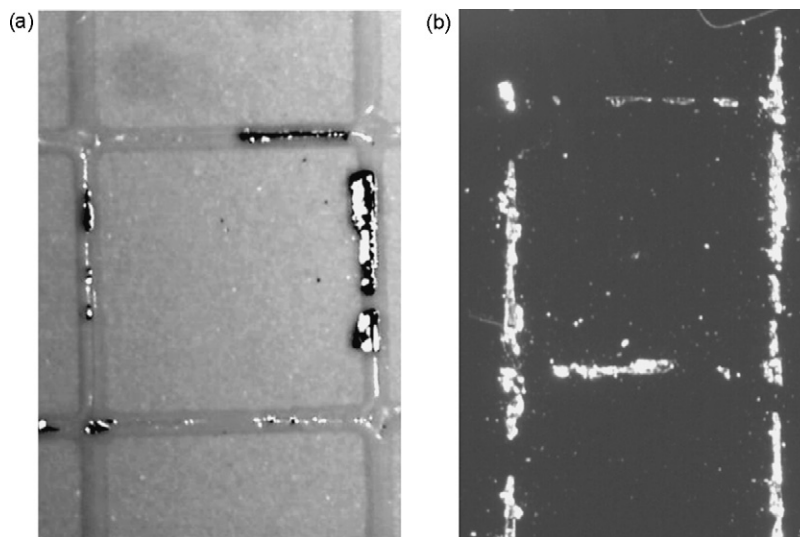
Fractures during cooling occurring in Si: (a) screen-printed glass paste on LTCC and (b) silicon wafer after fracture.
